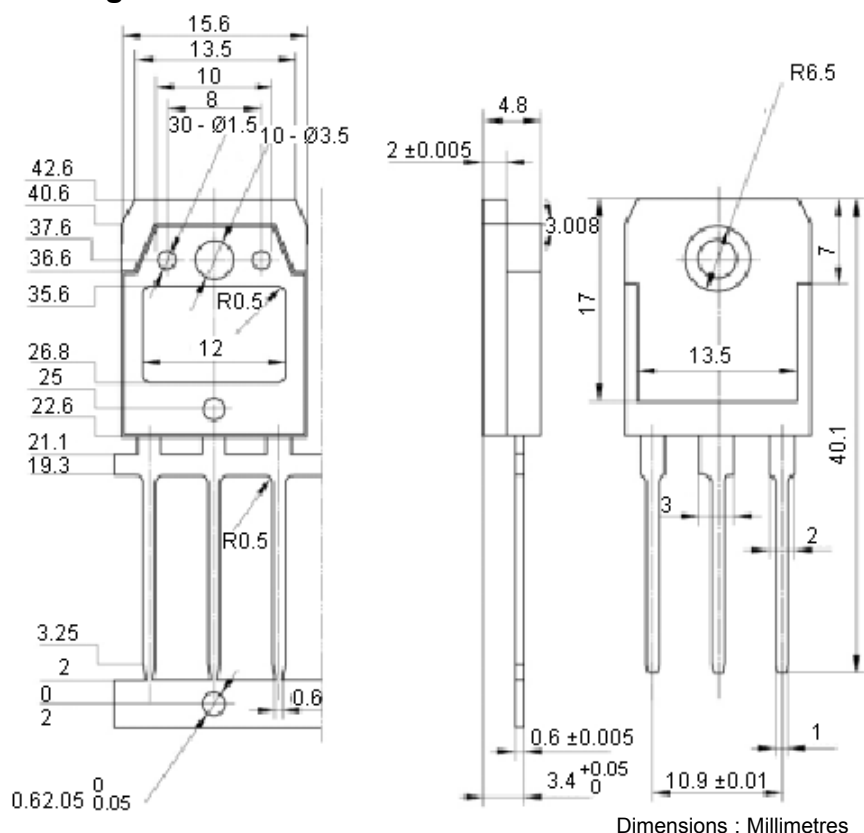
Outline Dimensions (Unindicated Tolerance : ±0.1 mm)
